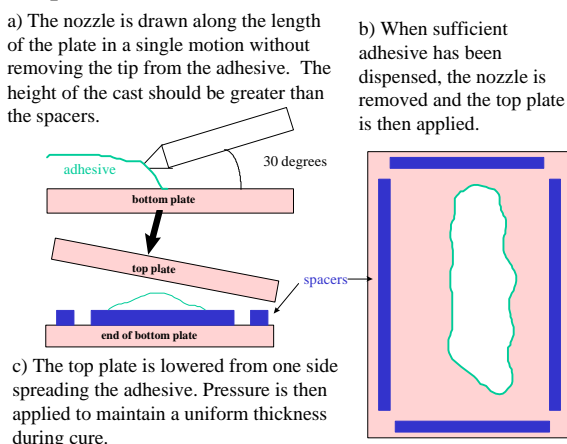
Dispensing a viscous adhesive to manufacture a plaque of bulk adhesive having a uniform thickness.
